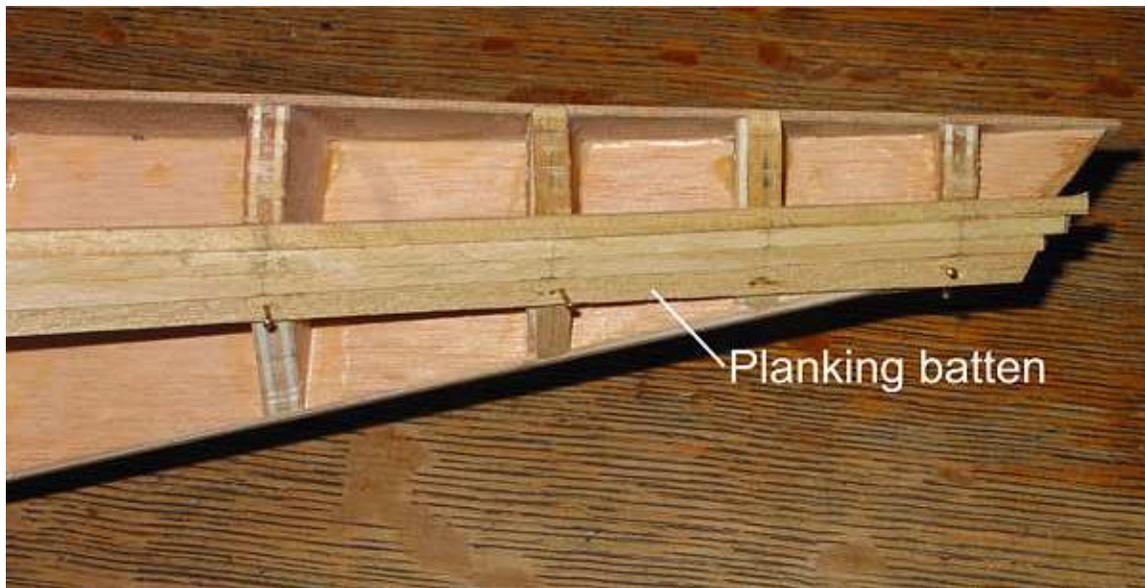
First planking belt at bow. Note that at bow, there will still be room for 7 planks. Planking batten will be removed after planking the first belt.
